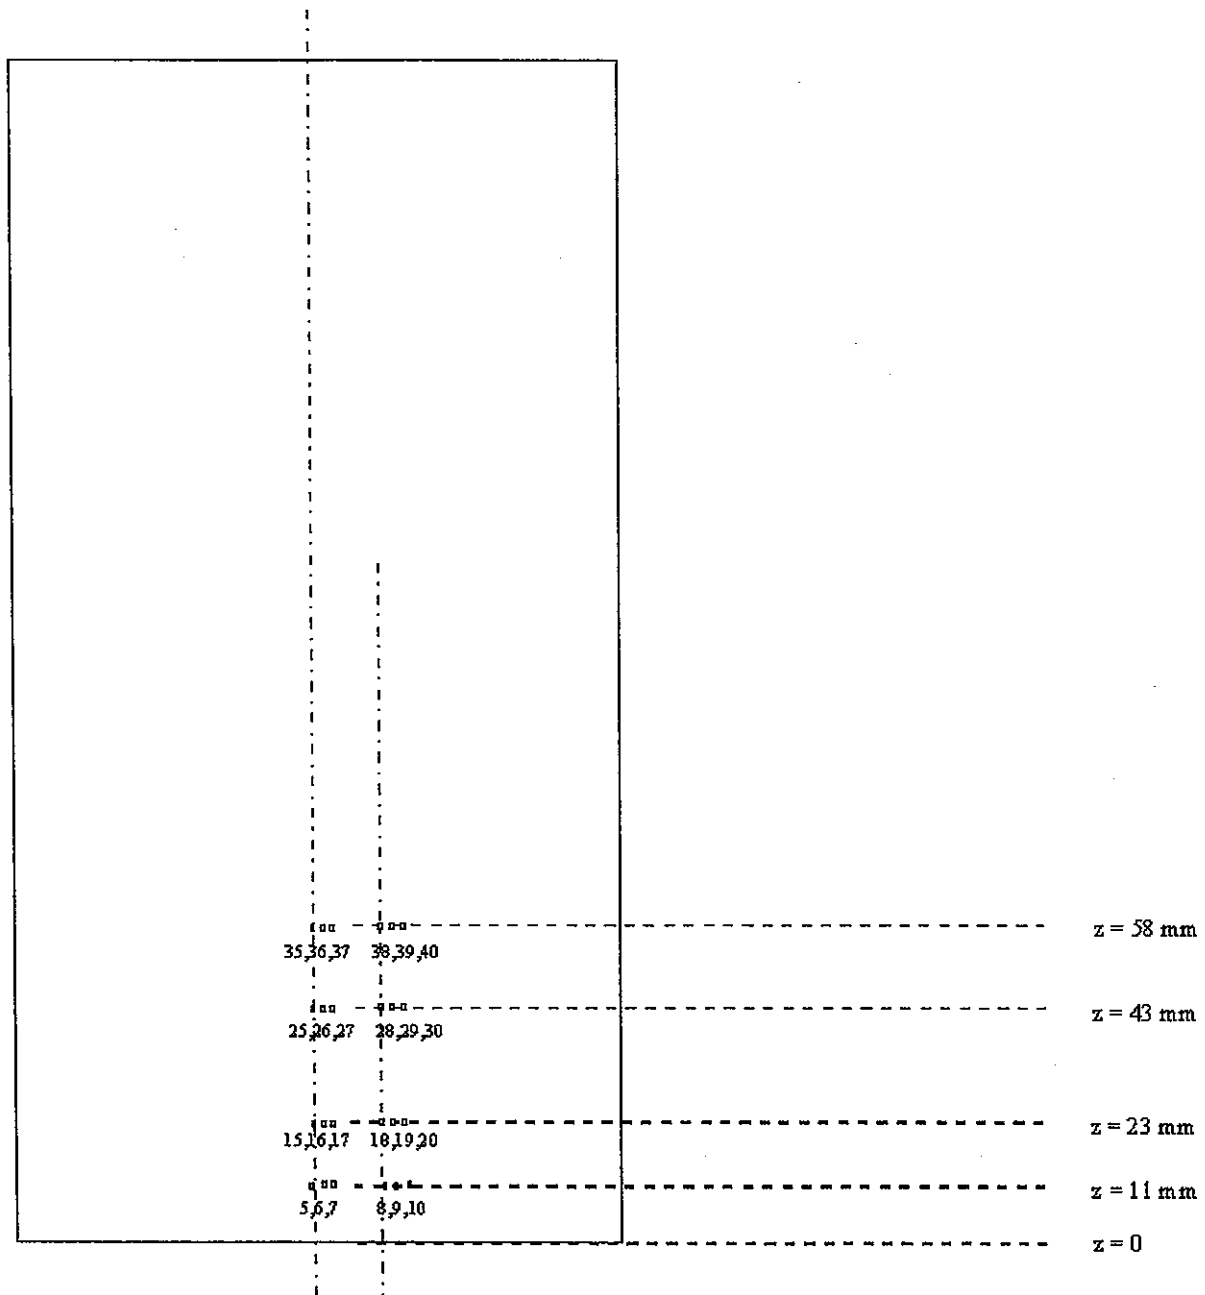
Plate of 316L steel (VIRGO) with weldment, details of thermocouple locations in the welded plate
